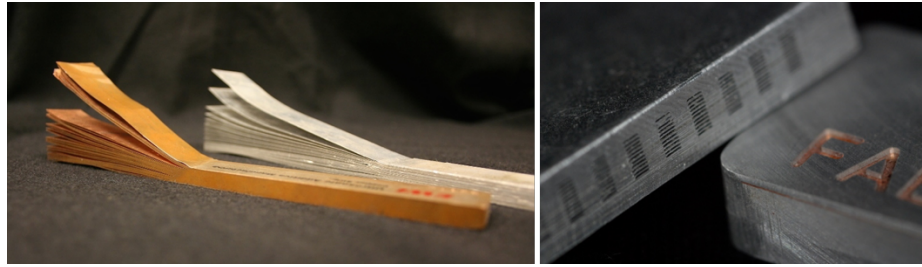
(left) Fabrisonic demo samples showing the result of the process prior to trimming the excess foil stock off the part. (right) Example of a heat exchanger fabricated with this technique. Note the voids within the cross-section through which fluid could flow (or in my work, PCM could be embedded). Figures courtesy of Fabrisonic [152].
